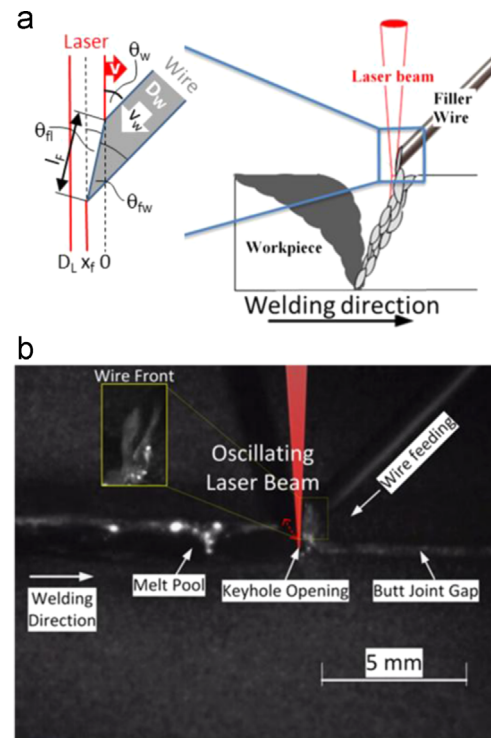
(a) Sketch (and magnification) of the melt transfer and weld pool in laser keyhole welding with leading filler wire addition; and (b) a typical high speed image (and magnification) of the laser welding process with leading filler wire addition.
